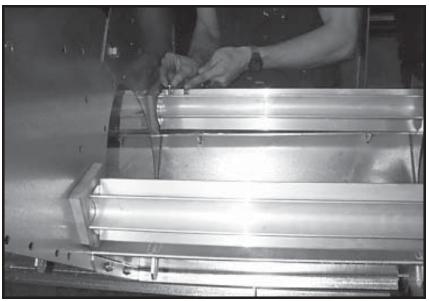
Inserting clevis pins in meter roll assemblies.
